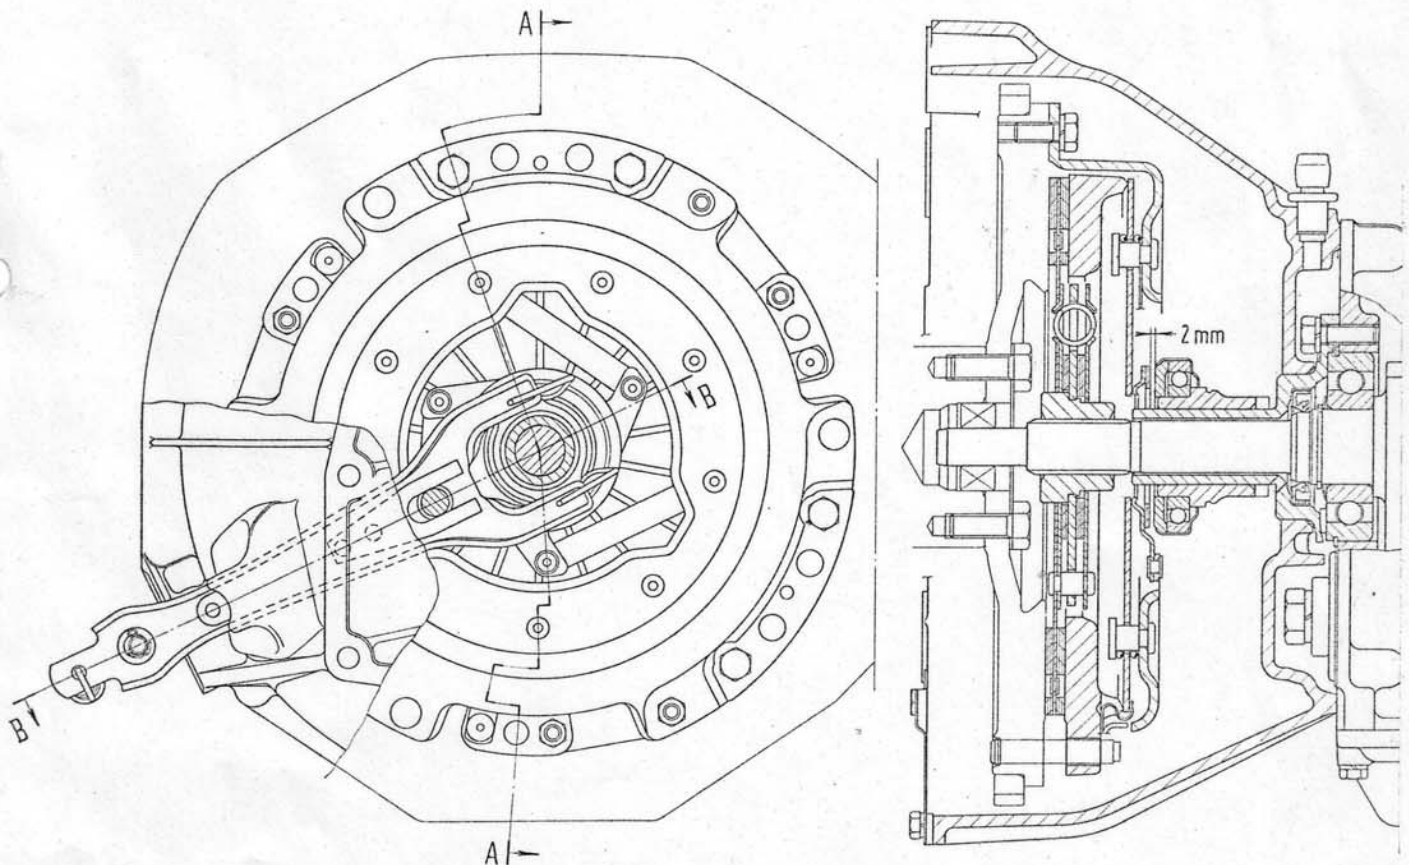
Clutch assembly viewed from throwout lever end and clutch side section A-A.
